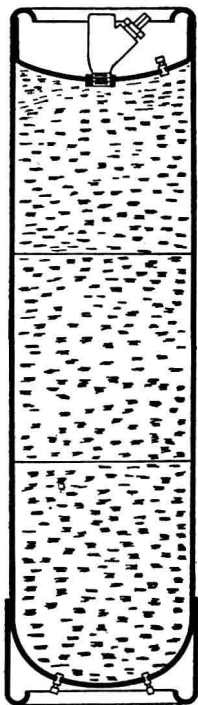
Sectional view of a type of acetylene cylinder where the filler is made of pressed cylindrical disks of asbestos. The cylinder is a deep drawn vessel with an open end at the top. The disks are compressed to exactly fit the space, forced into place, and the head at the top of the cylinder pressed into position. It is then brazed and the top edge of the cylinder is rolled over as indicated. A base of a cylindrical piece of steel is rolled at the lower edge and shrunk upon the bottom of the cylinder. Note the fuse plugs at the bottom and the top of the cylinder. As the valve is in the recessed top of the cylinder, it is protected from injury, and no cap is necessary.
